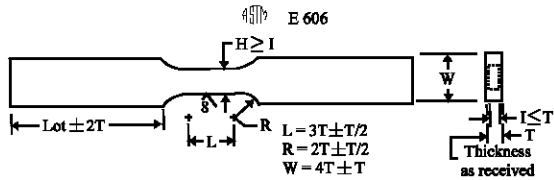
Flat-sheet fatigue specimen with rectangular cross section; $2.54 \text{ mm } (0.1 \text{ in.}) \leq I \leq T$
